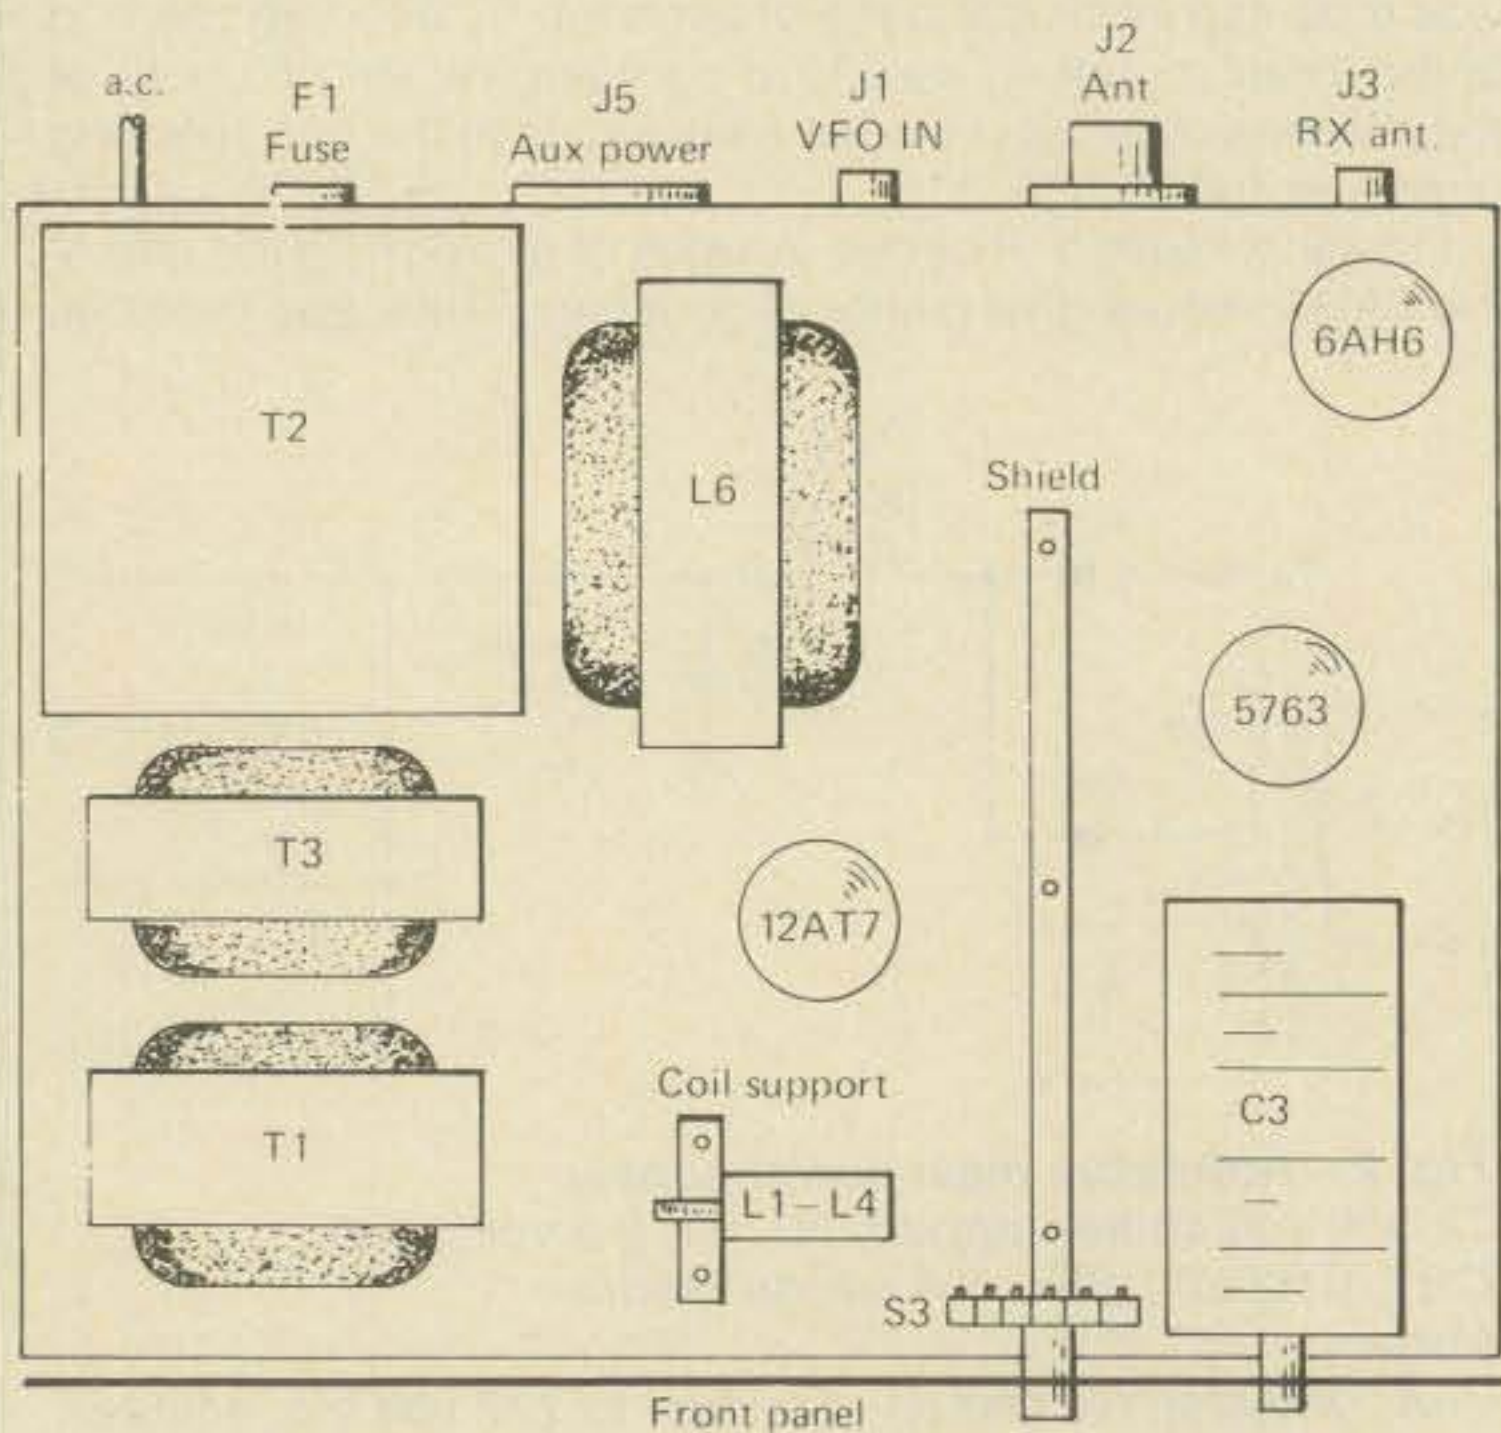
Sketch of top chassis layout showing major components mounted on the chassis itself. C2 and L5 are mounted above C3. Below chassis, terminal strips are mounted on either side of the 12AT7 and on the shield side of the 5763 for component mounting. A shield of thin aluminum flashing surrounds the below chassis circuitry of the 6AH6, and the tube is shielded above chassis. Chassis size: 7"x9"x2".
